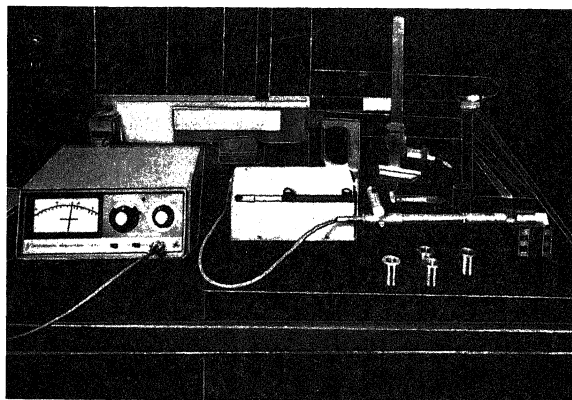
On-the-floor inspection of surface finish.
